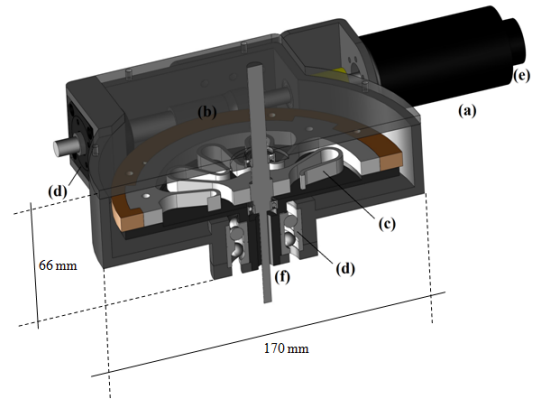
Cross section of the rotary SEA showing drivetrain components
